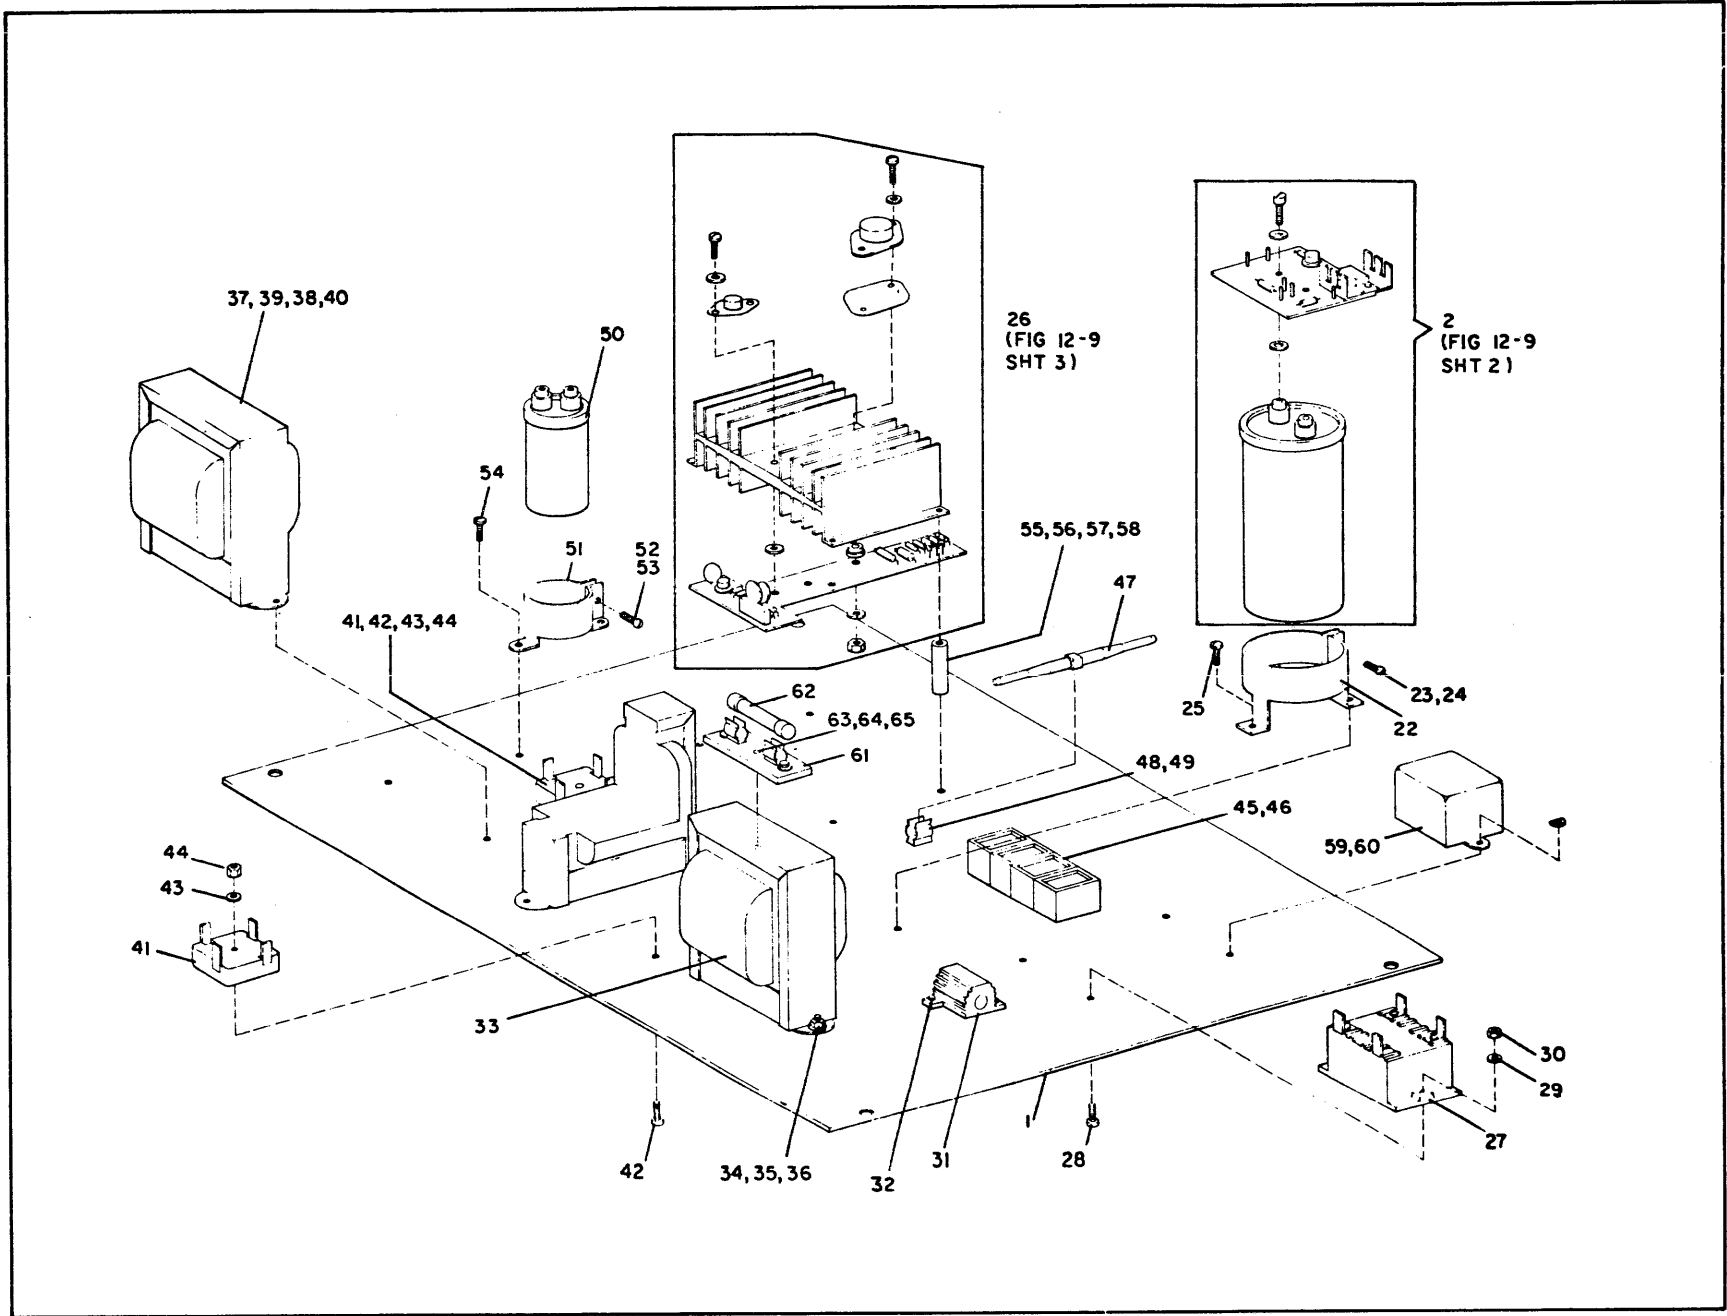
BASE PLATE ASSEMBLY (sheet 1 of 2)
